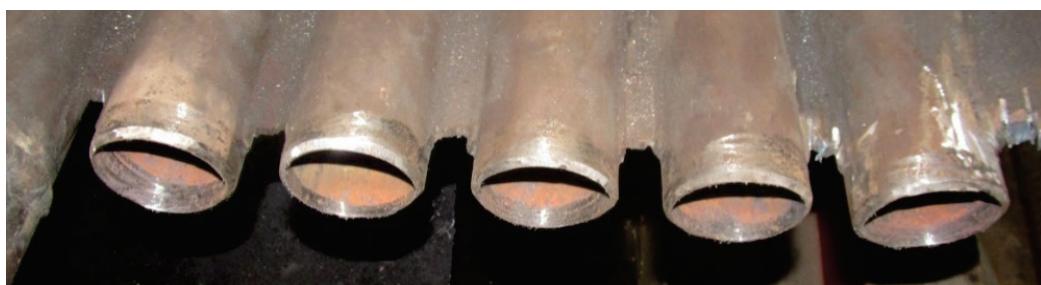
Preparation of bottom panel boiler tubes for welding; edges are filleted, degreased and cleaned.
